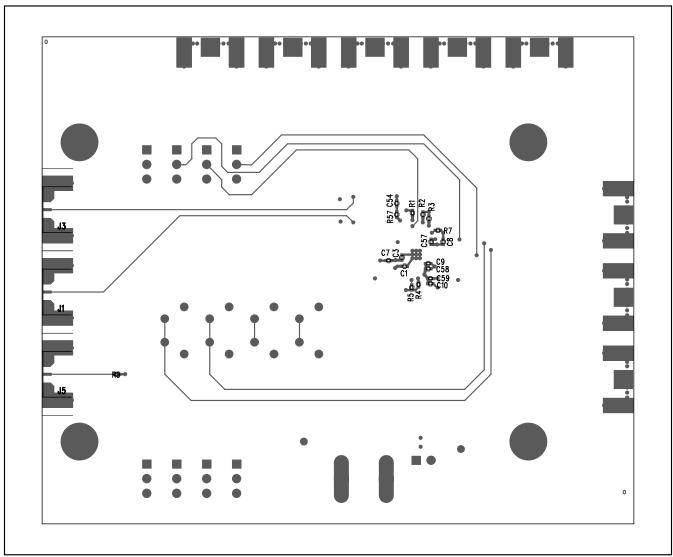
MAX3624 EV Kit Assembly Drawing—Bottom Side
